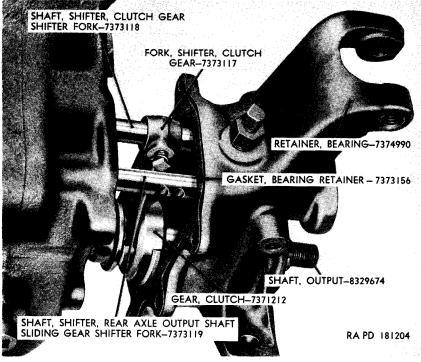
Transfer front axle output shaft bearing retainer partially removed.
